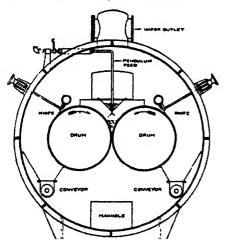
The Buflovak Double-drum vacuum dryer Courtesy of Buffalo Foundry & Machine Co.
